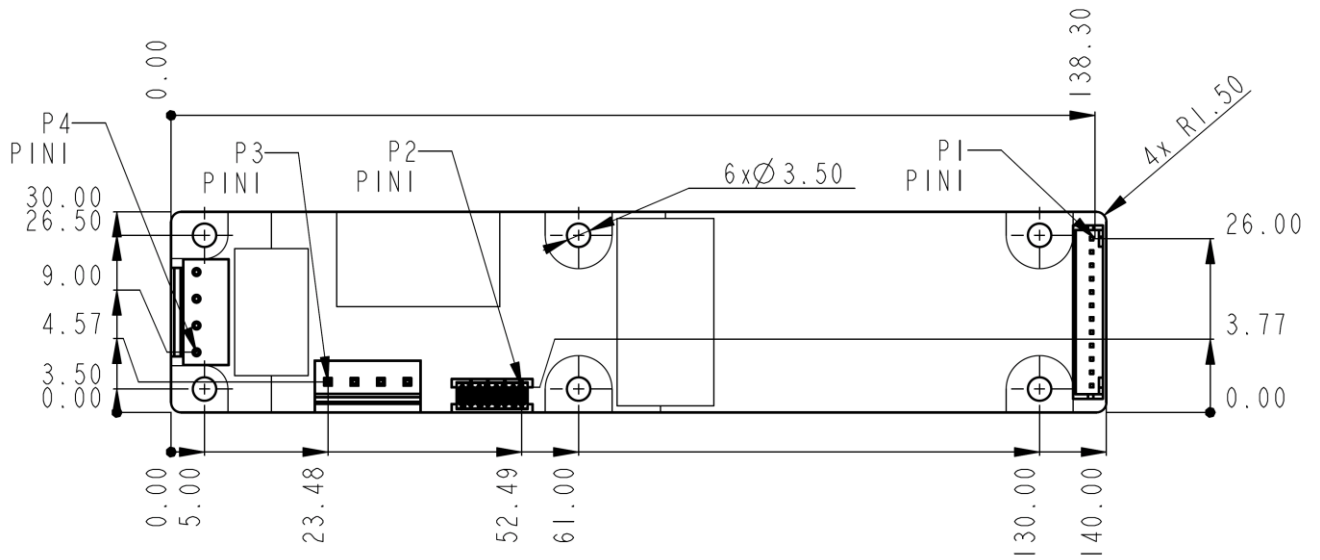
ICEpower80AM2 board mechanical outline. Physical dimensions in mm.
